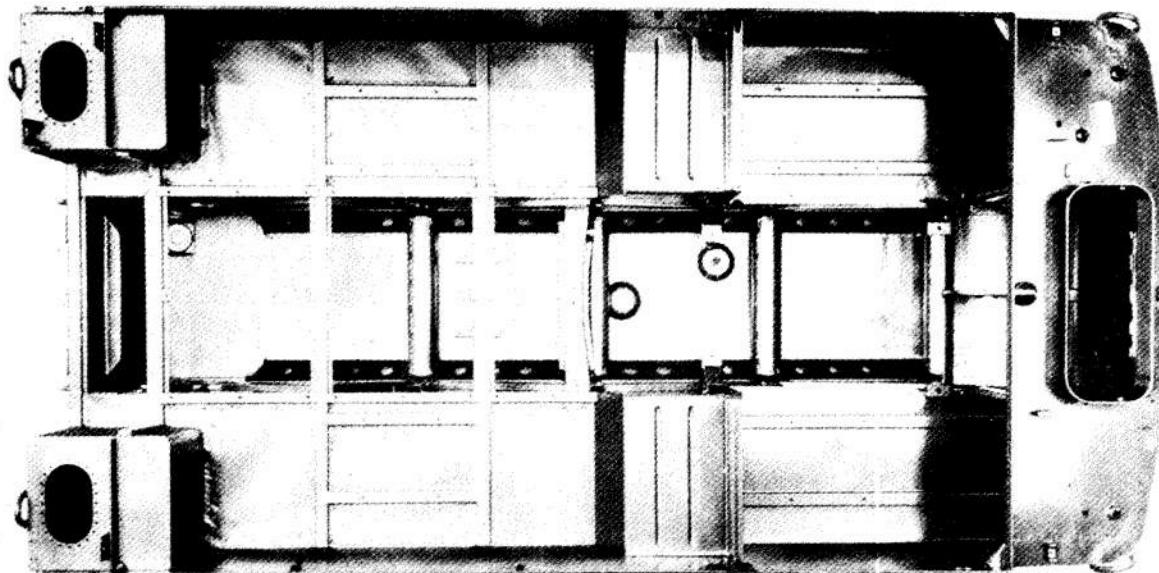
Typical Floor and Wall Construction, XM138 Self-propelled Howitzer
